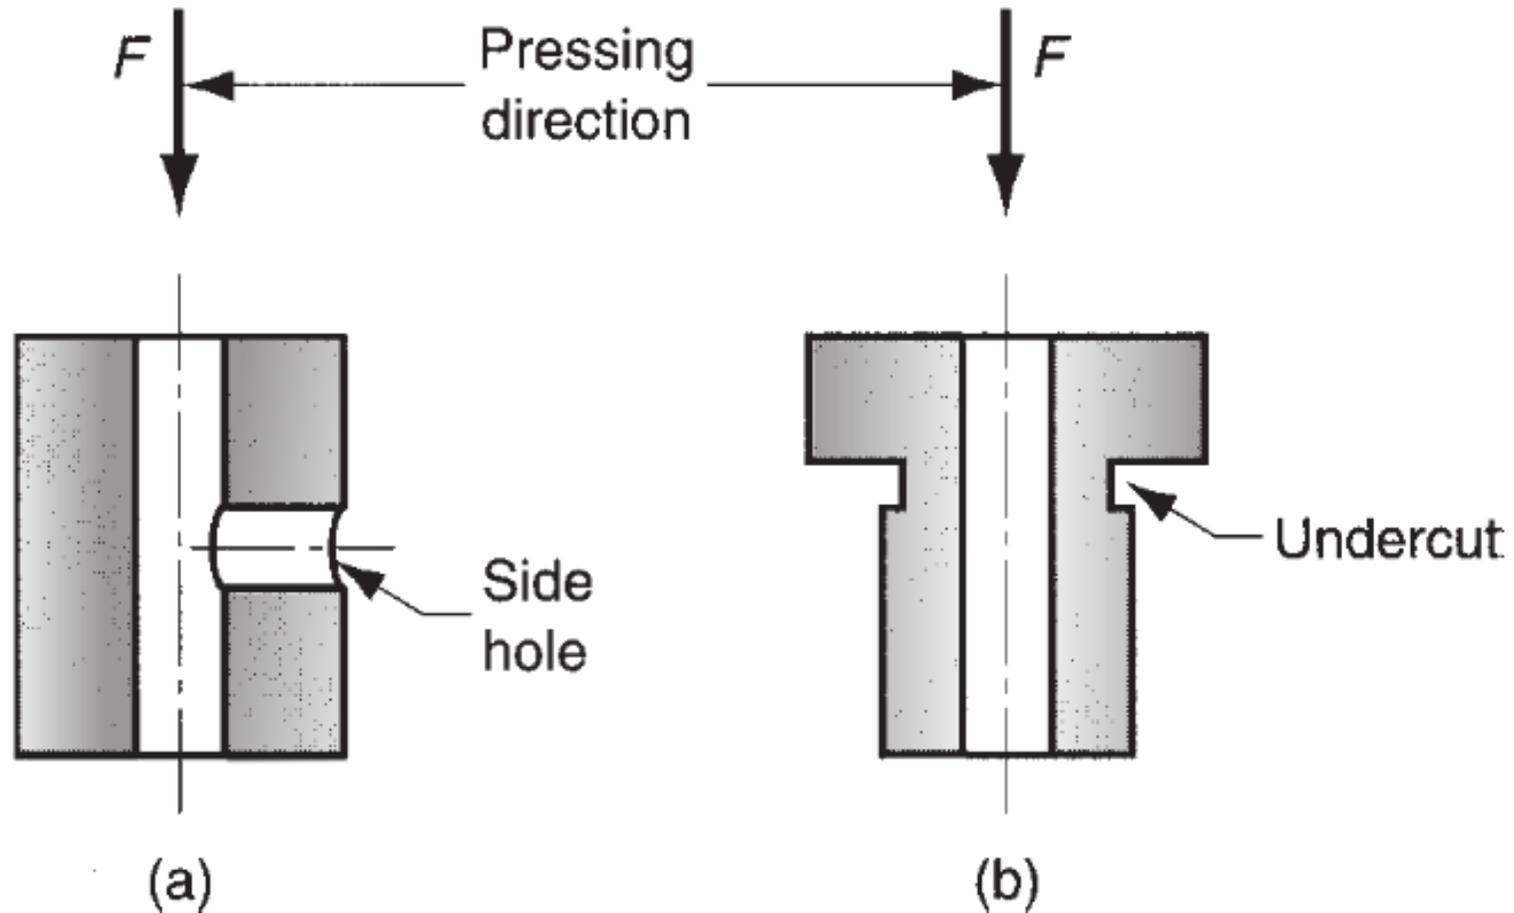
Part features to be avoided in PM: (a) side holes and (b) side undercuts. Part ejection is impossible.
